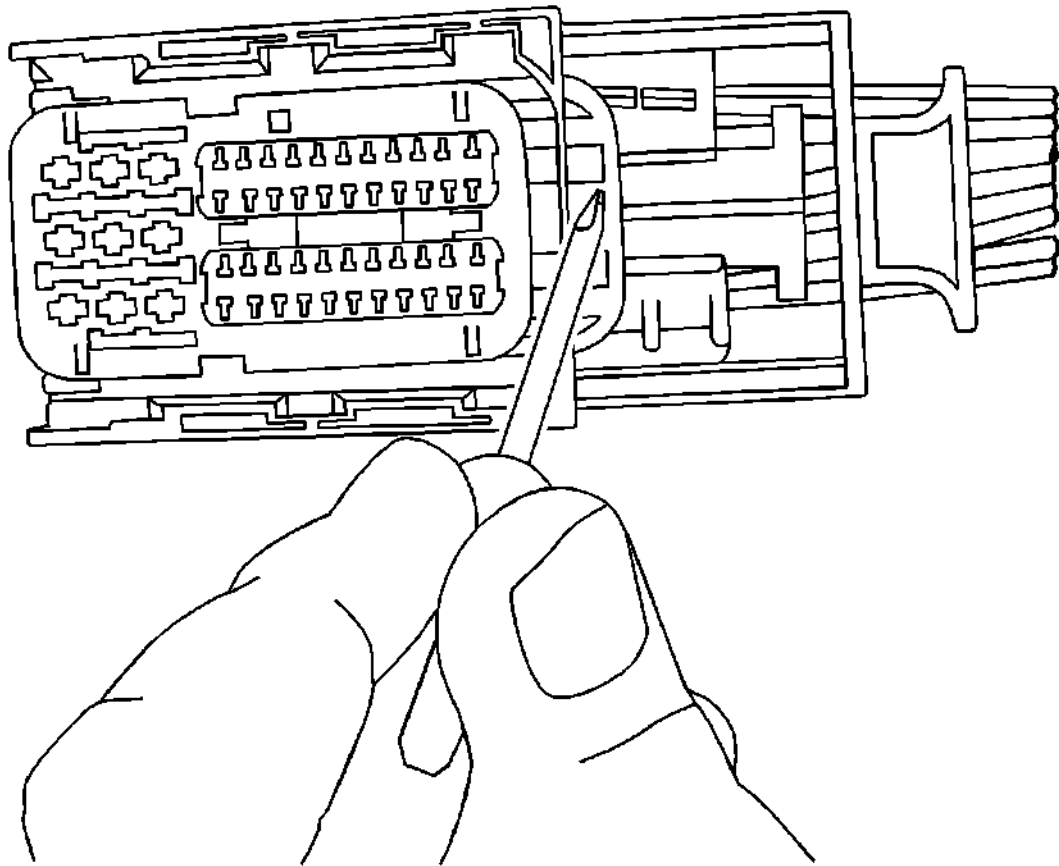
Using Small Flat-Blade Tool To Remove Rear TPA
